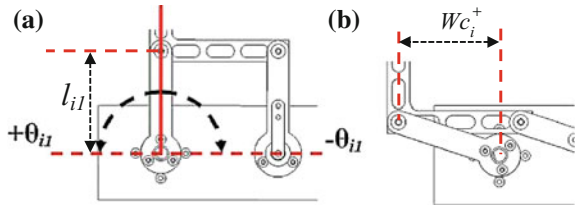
Mechanism parameters: a CAD model, b sketch view
